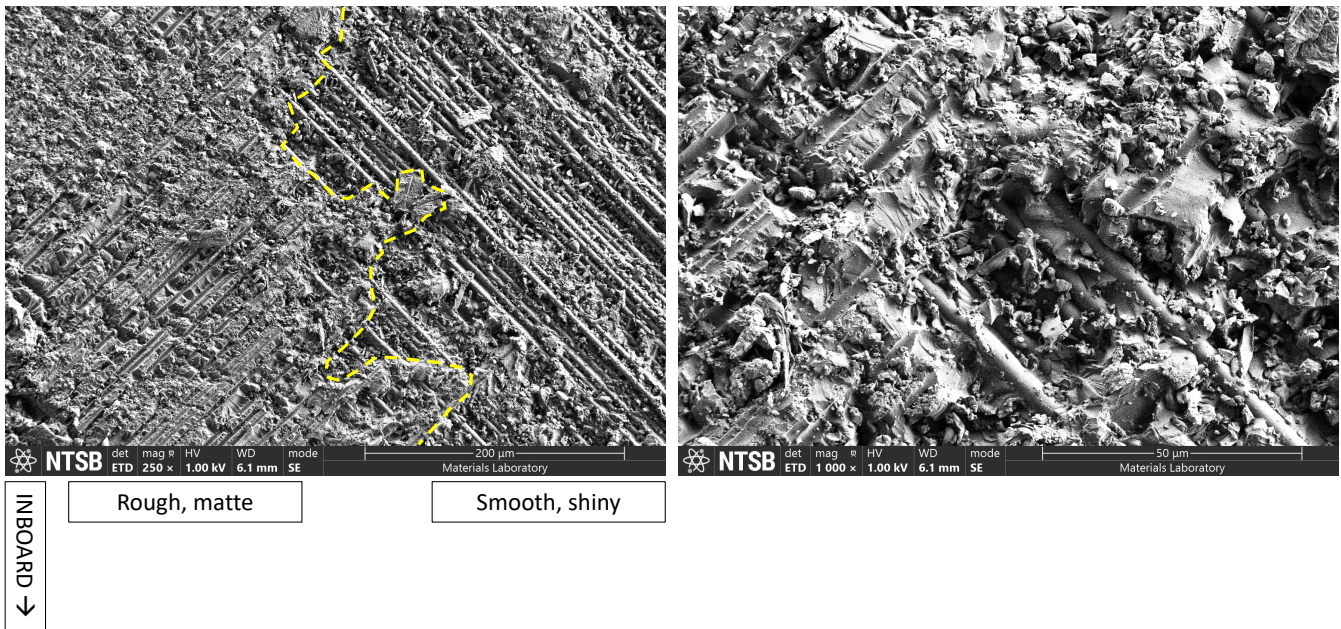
Left: A secondary electron image of the boundary (yellow dashed line) between smooth/shiny and rough/matte appearing areas on the spar fracture surface adjacent to the red blade flat fracture surface. Right: A higher magnification view at the boundary.
